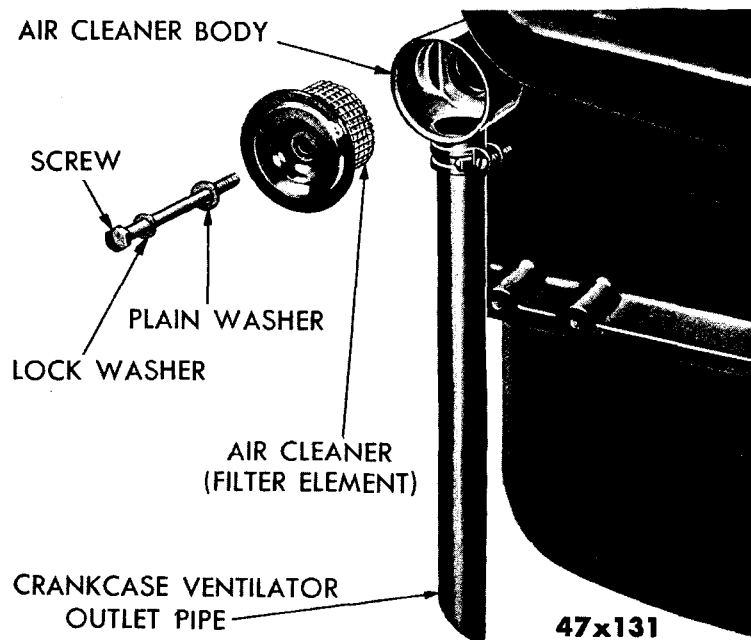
Crankcase Ventilator Outlet Pipe Air Cleaner
